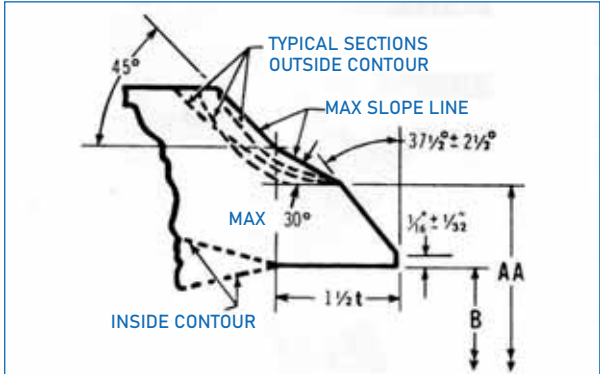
A–Welding End for No Backing Ring or for split Backing Ring. Pipe Wall Thickness “t” 7/8 in. and less.
